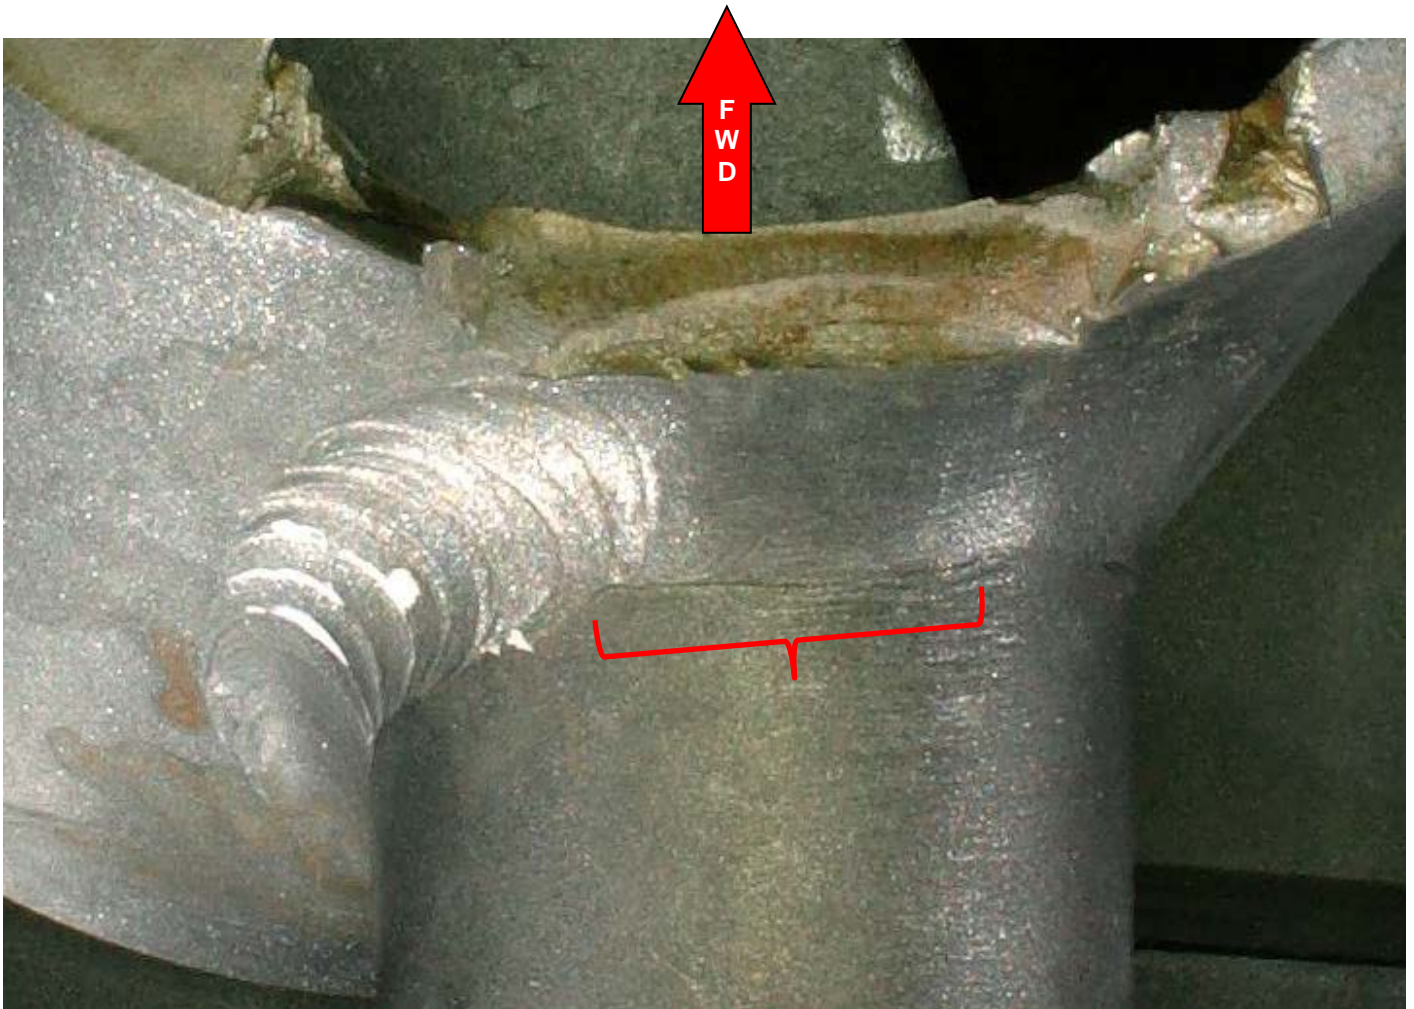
Optical view of the left gusset tube to strut weld showing a crack (bracket) at the aft toe of the weld. Also note the post weld grinding of the weld bead surface at the forward edge.
